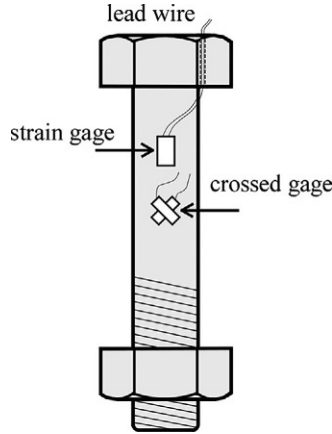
Bolt specimen for measuring bolt force and thread torque.
